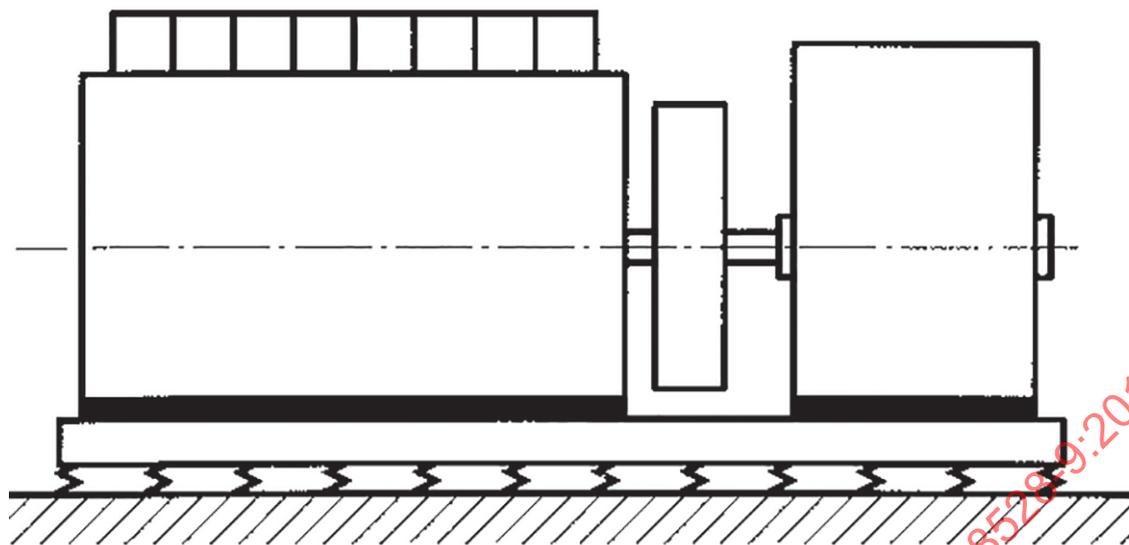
Engine and generator rigidly mounted on resiliently mounted base frame
